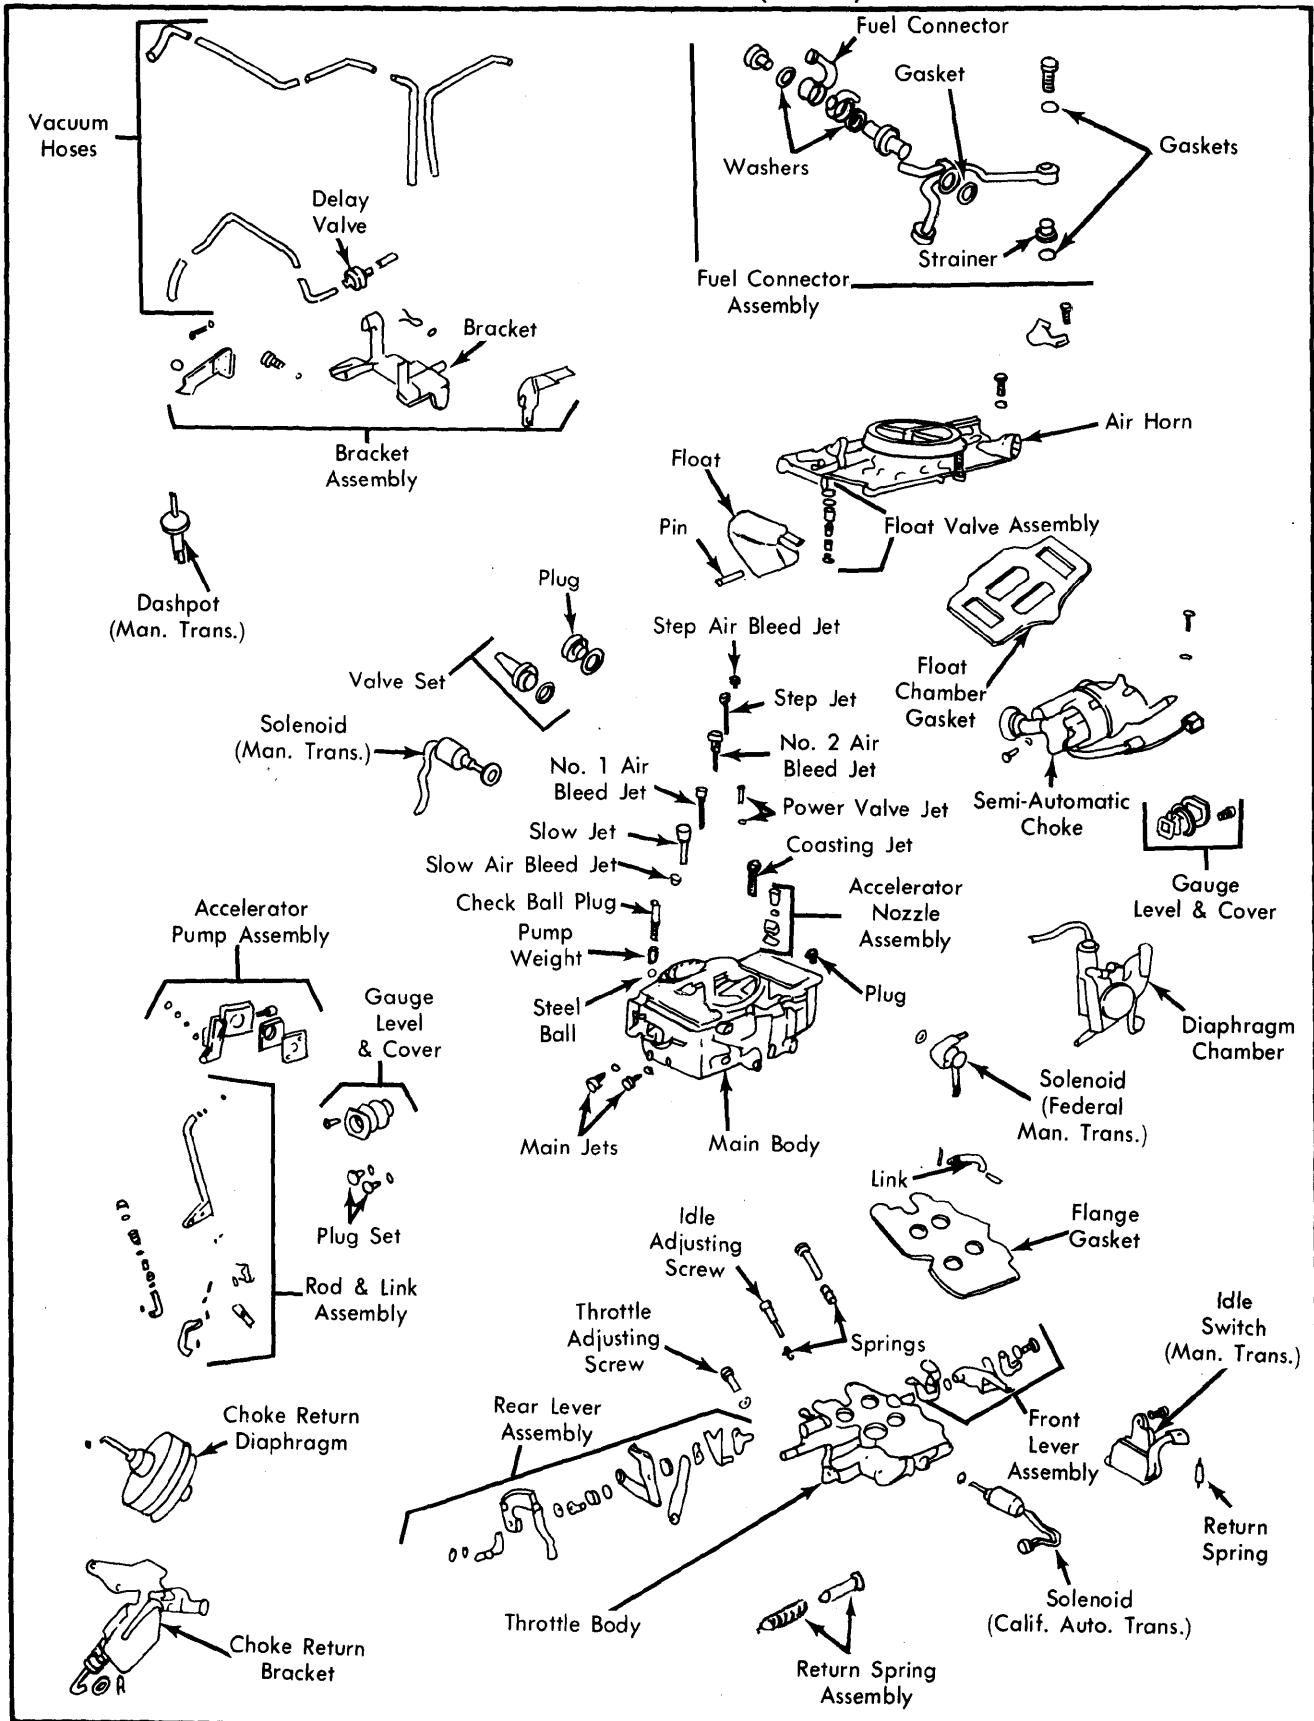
Exploded View of Hitachi 4-Bbl. Carburetor (Mazda RX7)
